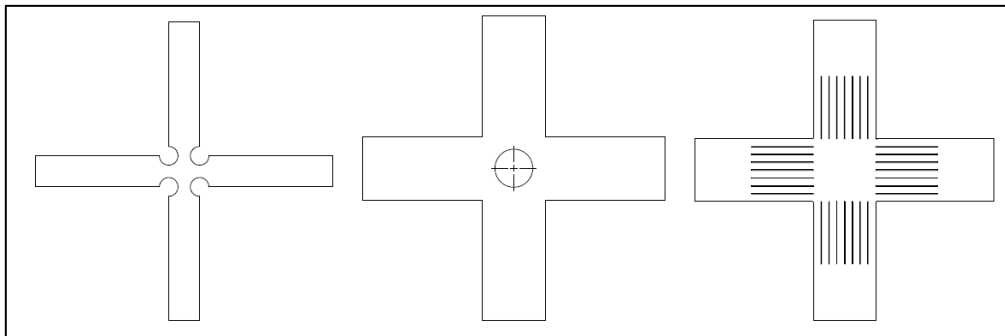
Types of cruciform specimen - Left to right – Cut type, Reduced section type and Strip and slop Type [22]
